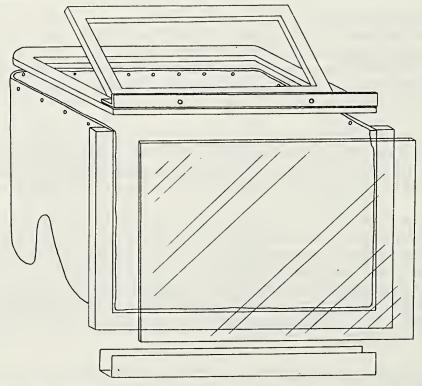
Exhibit components prior to assembly. Opening in hinged top should be covered by wire mesh. Glass is installed using silicon sealant and aluminum channel attached over glass bottom and wooden strip.
